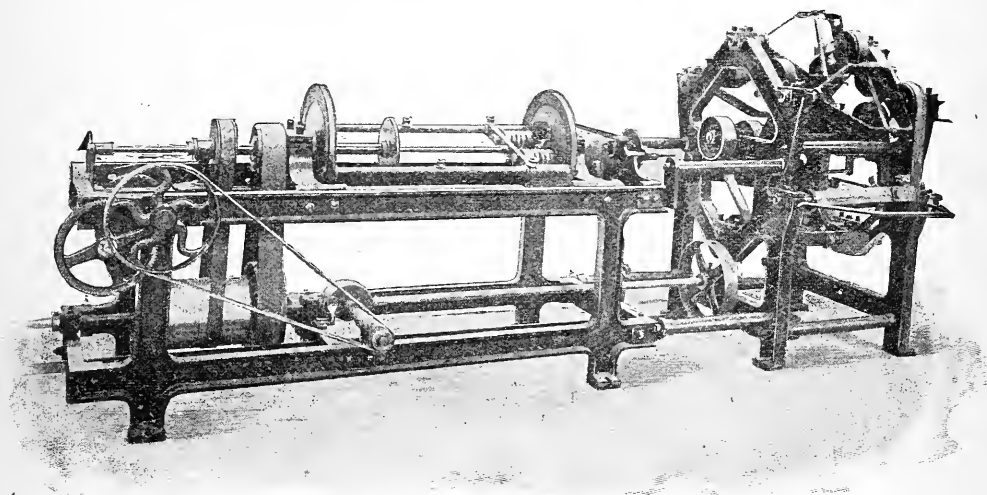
Horizontal laying machine for cords, etc. (5 to 8-fold).
